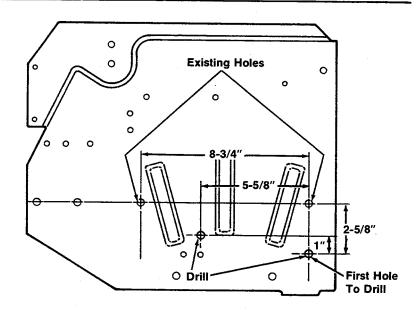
GTH/6500/1800 Series Rear Frame - Left Side View
